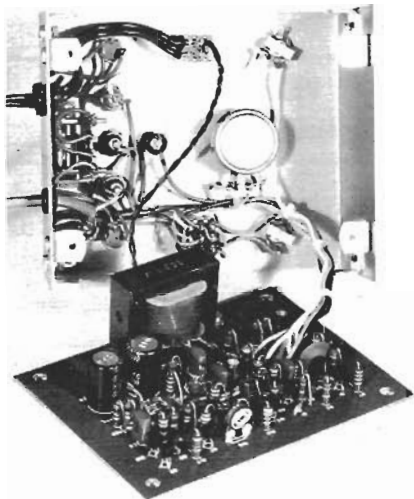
INSIDE VIEW of the completed Transistor Curve Generator. An 8-conductor cable is used between the circuit board assembly and the front panel.
